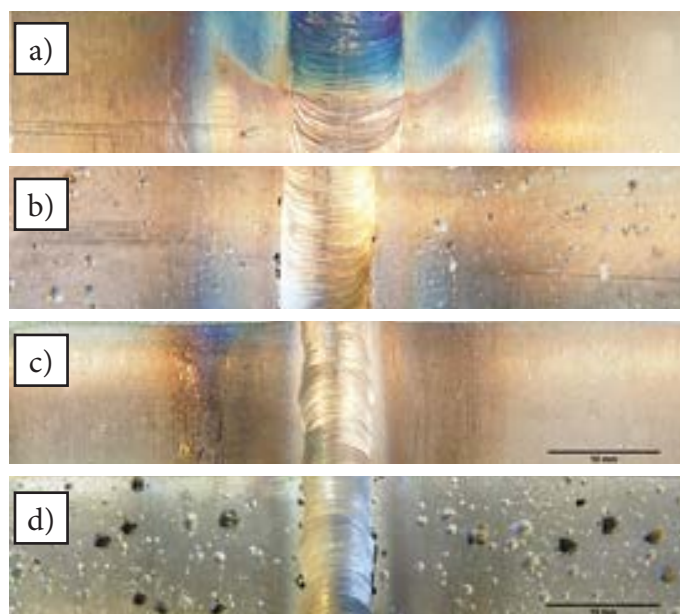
Specimen no. 2, where temper colours were not removed: a) weld face before the corrosion resistance test, b) weld face after the corrosion resistance test, c) weld root before the corrosion resistance test, d) weld root after the corrosion resistance test
